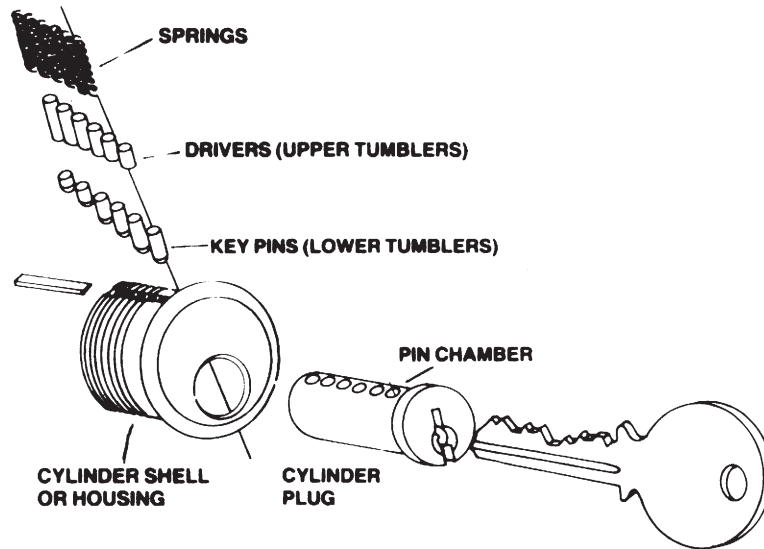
Basic pin tumbler cylinder lock mechanism.
